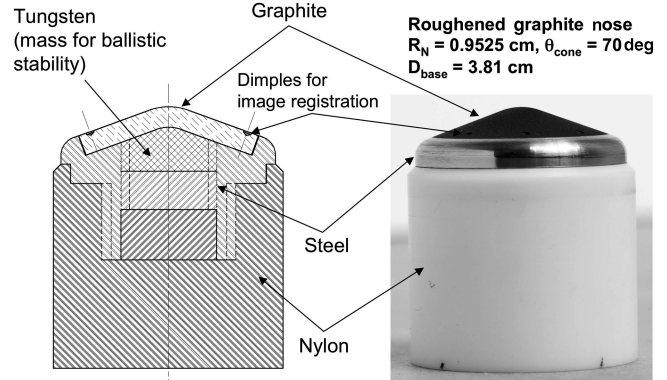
Engineering drawing and photograph of bead-blasted POCO graphite model for blunt large-angle cone geometry.
